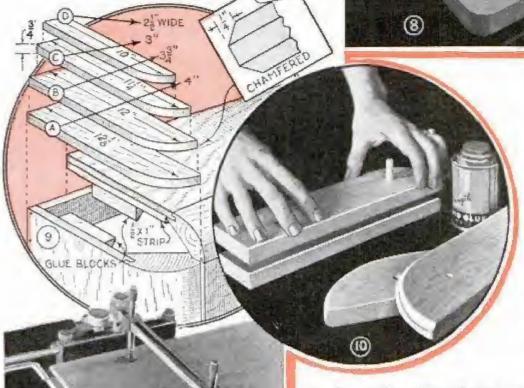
These are cut separately to size and the outer edges chamfered. Short dowels passing through the pieces will prevent them shifting when gluing together, Fig. 10. Prior to gluing the assembled block in place at the corner, a narrow strip first should be glued
